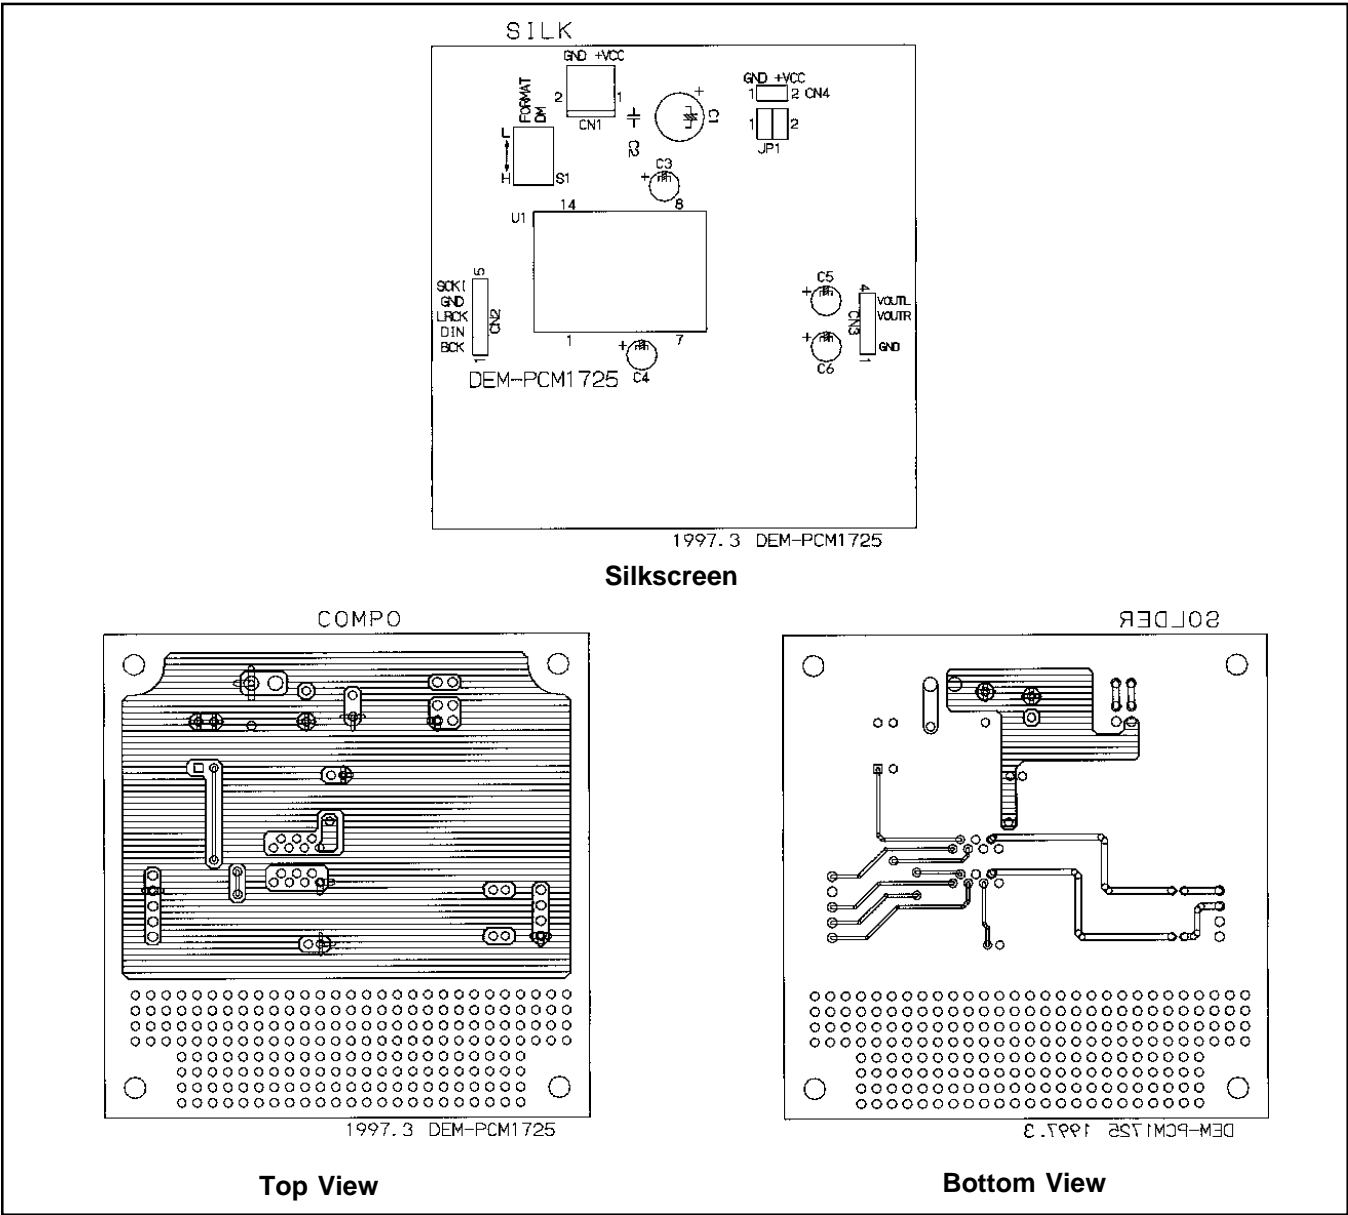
DEM-PCM1725 and DAI1725 Parts Layout.
